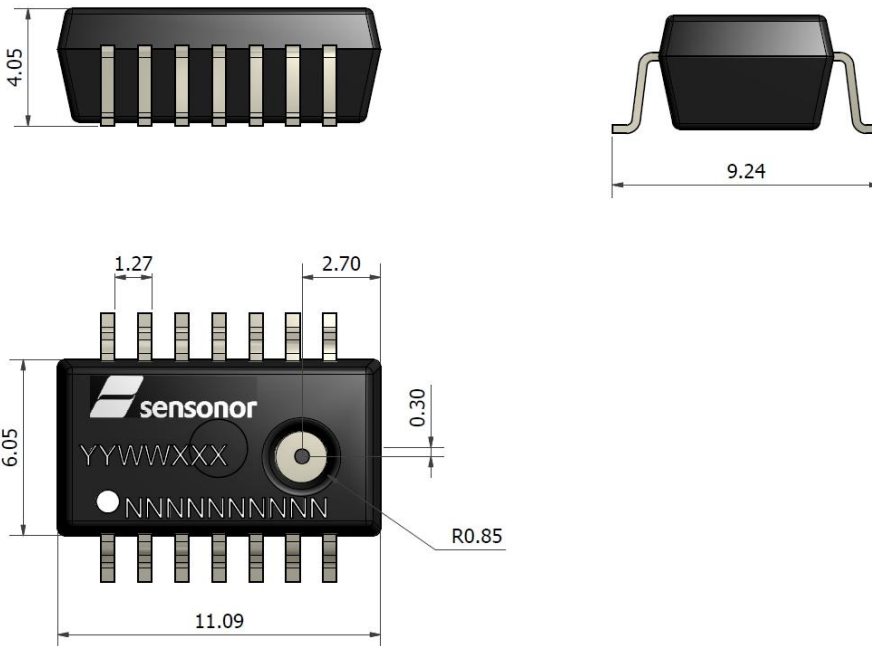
Physical dimensions and laser marking of sensor packages without tube connection
